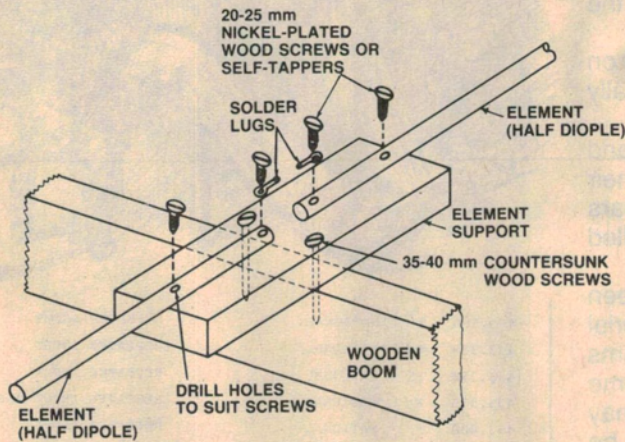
Element-to-boom mounting using wood construction. Estapol or stain all wooden components before assembly.
